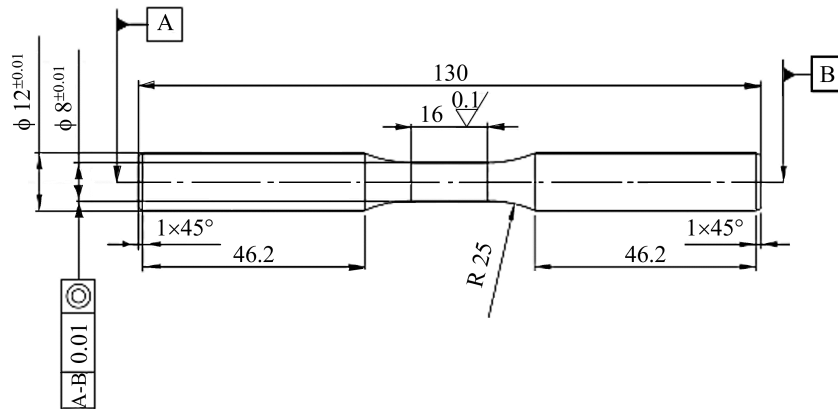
Technical drawing of the High and Low Cycle Fatigue specimen
